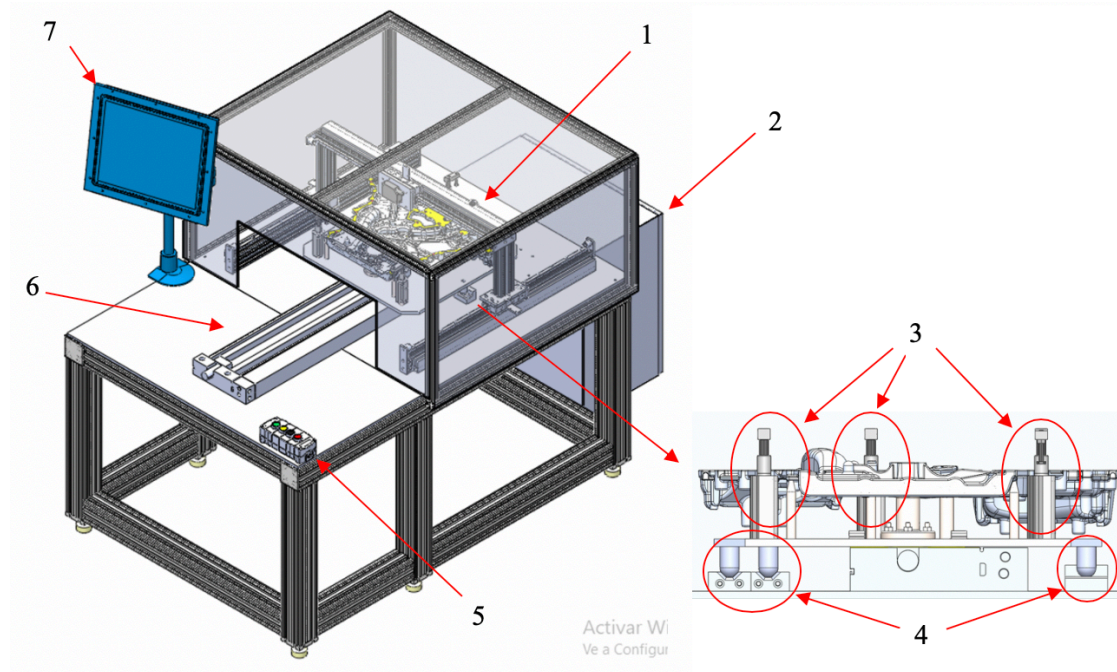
Laser measurement system 1) H-type gantry system 2) Electrical box 3) Fixing system and clamps 4) Control buttons 6) Pneumatic linear actuator 7) Screen
